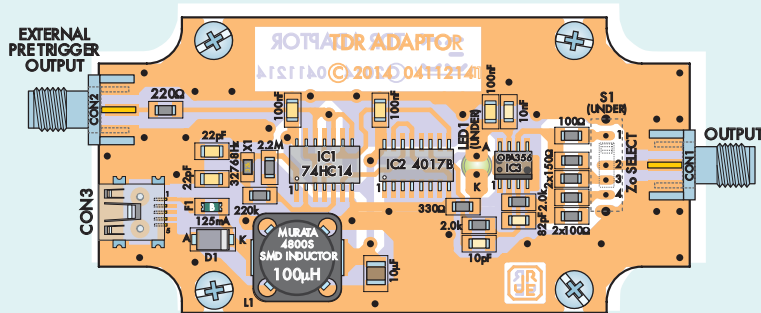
the PCB overlay diagram, shown actual size. Most of the parts are SMDs and are mounted on the top of the PCB. LED1 and selector switch S1 are mounted underneath.
